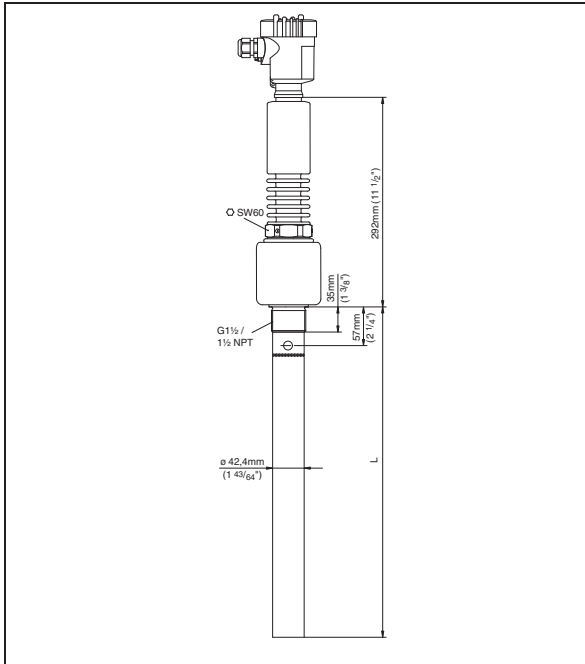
VEGAFLEX66 - coax version with thread (-200 ... +400 °C/-328 ... +752 °F)
